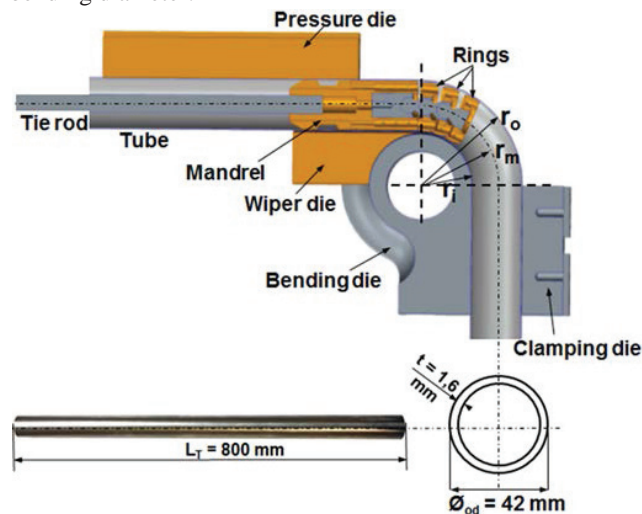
Sketch of the cross section of the rotary draw bending dies, and main dimensions of the tube in the as-delivered conditions.
